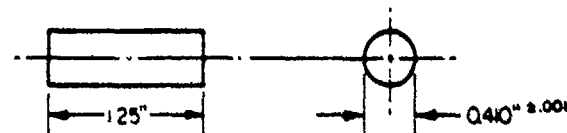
Subsize compression specimen for 15-5PH (H935) casting.
